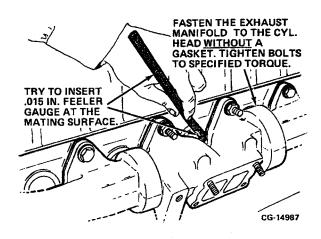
Checking for Warpage (With Three-Piece Manifold Shown) {Method Two}
